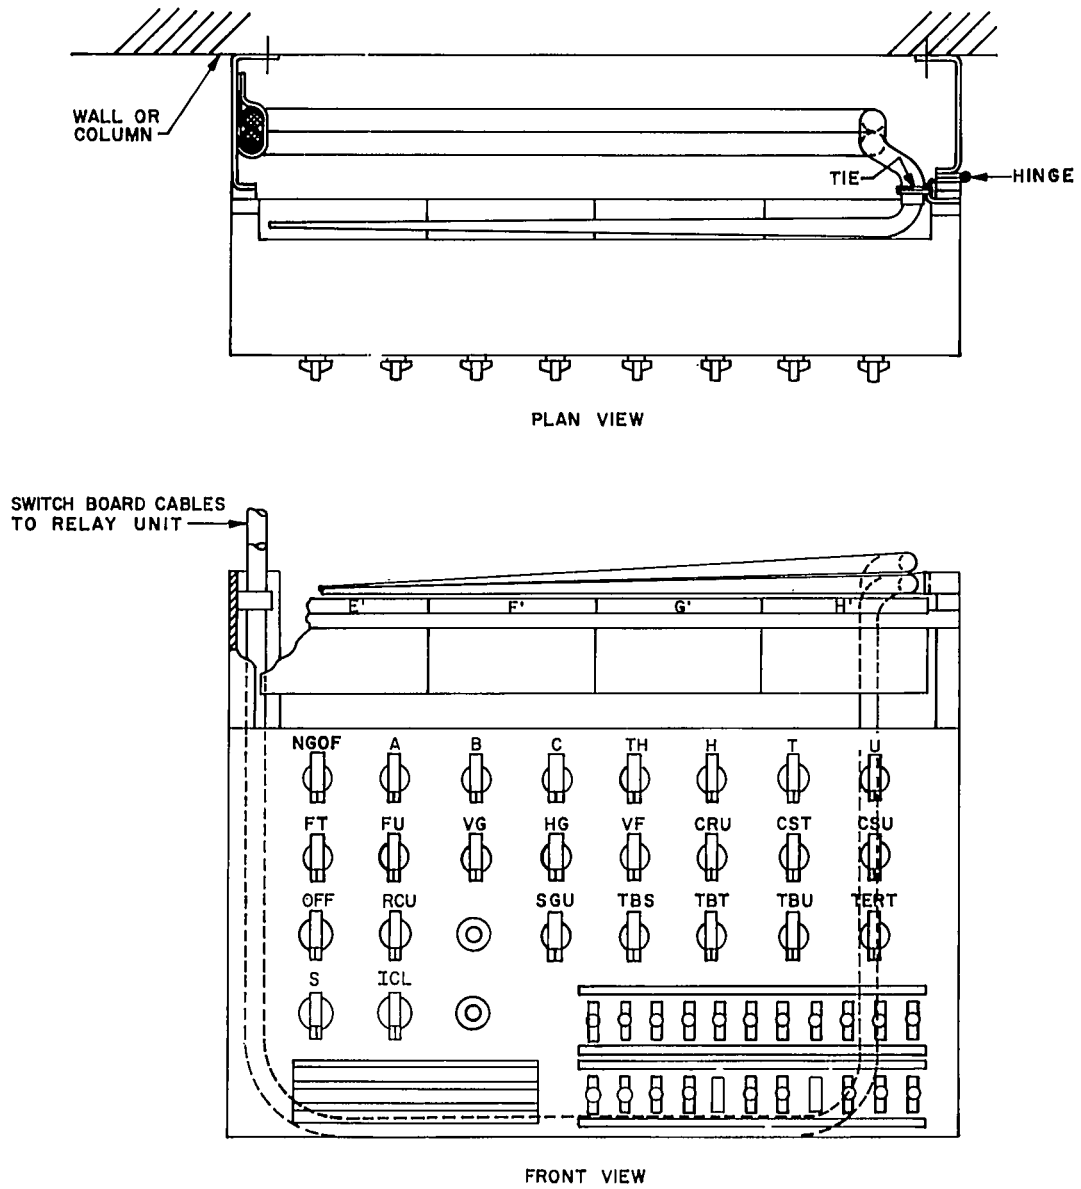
Switch Panel Unit Mounted on Wall or Column
